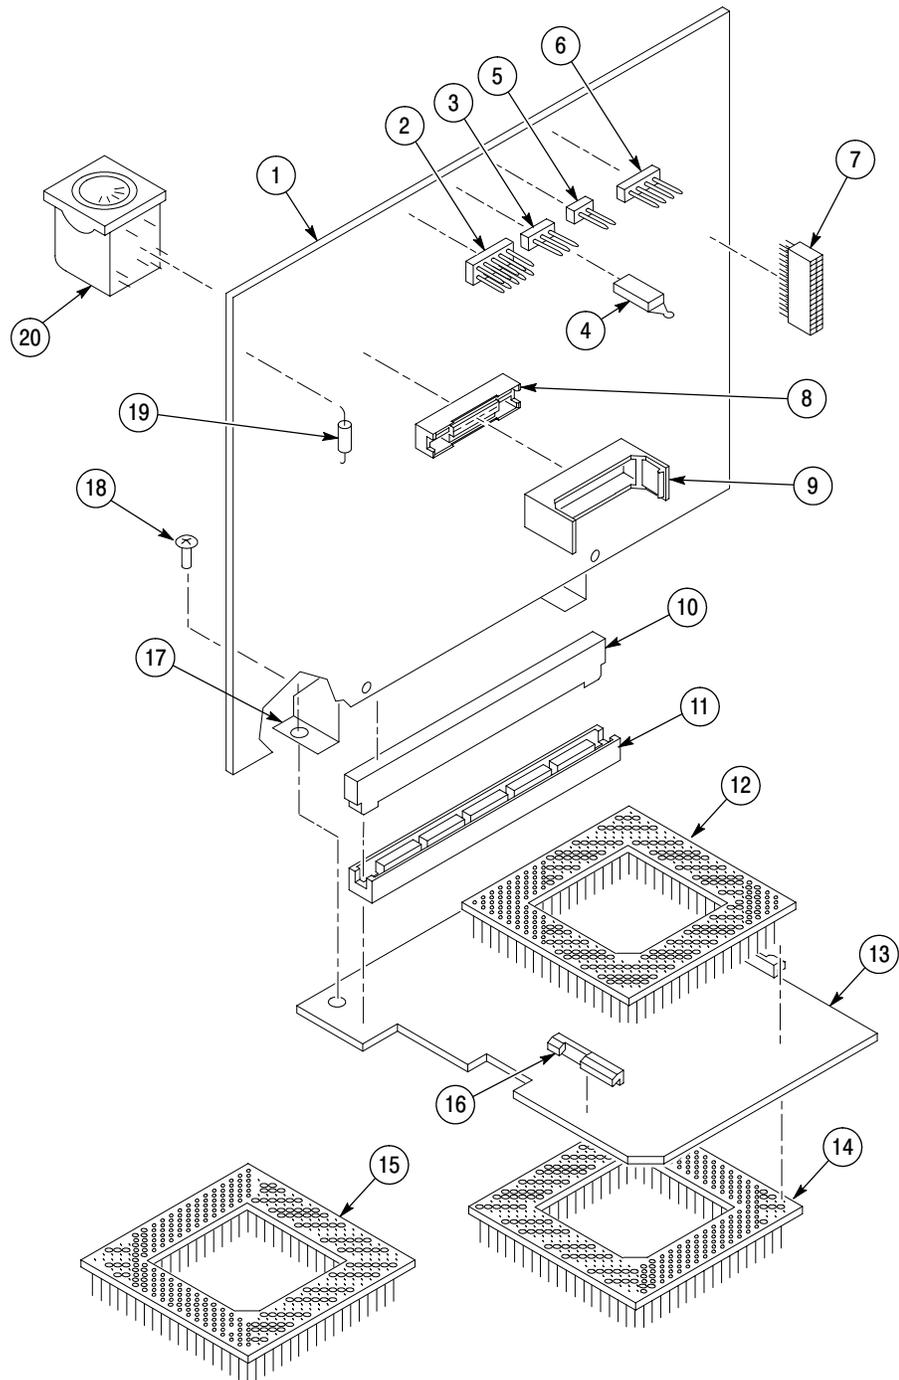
Exploded view of the TMSPGC PGA370 probe adapter
